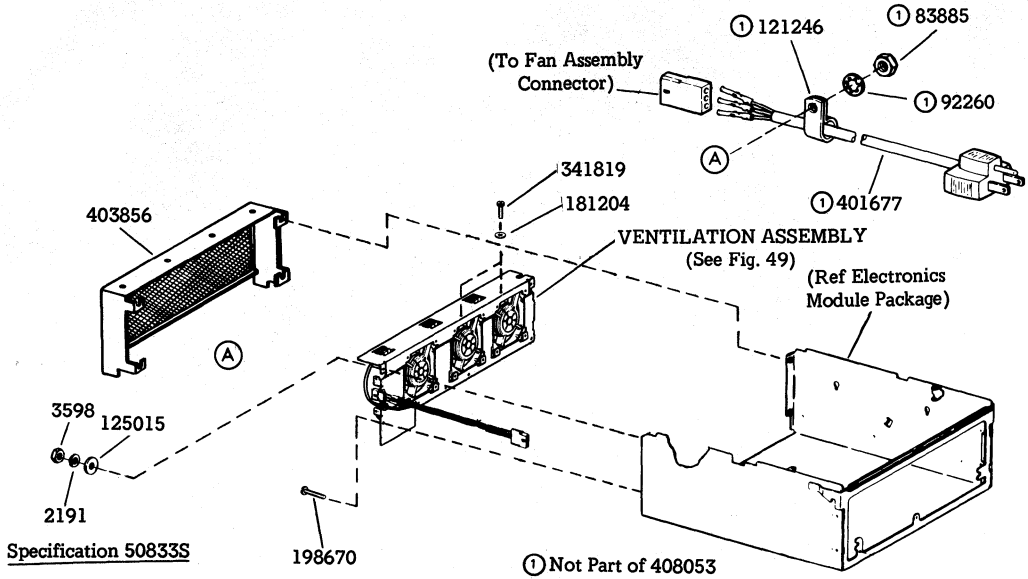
408053 Modification Kit to Provide Ventilation Assembly to 40CAB901/AF, AG (Air-flow Through Bottom) and 40CAB902/AB Cabinets
